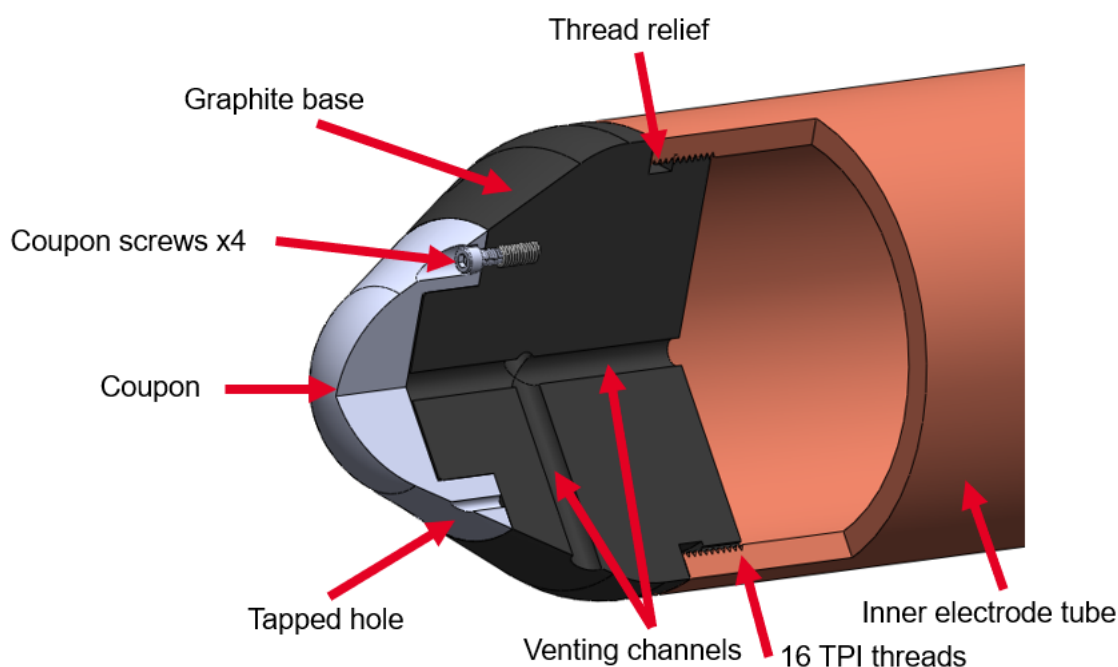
Section view of the redesigned ZaP-HD electrode assembly with removable coupons, illustrating internal features and venting channels. The coupon is fastened to a graphite base component. The base component threads into the copper electrode tube. The overall profile of the redesigned nose cone is identical to the previous design.
